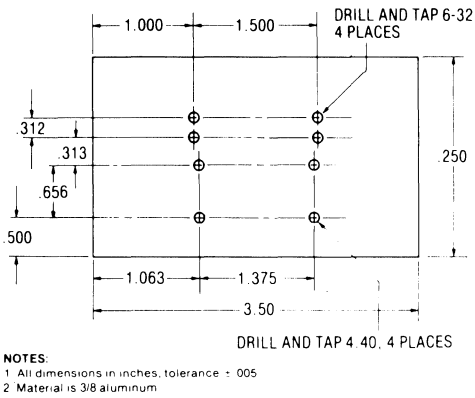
Heatsink Base Plate Construction for Hybrid Amplifier Test Fixture
